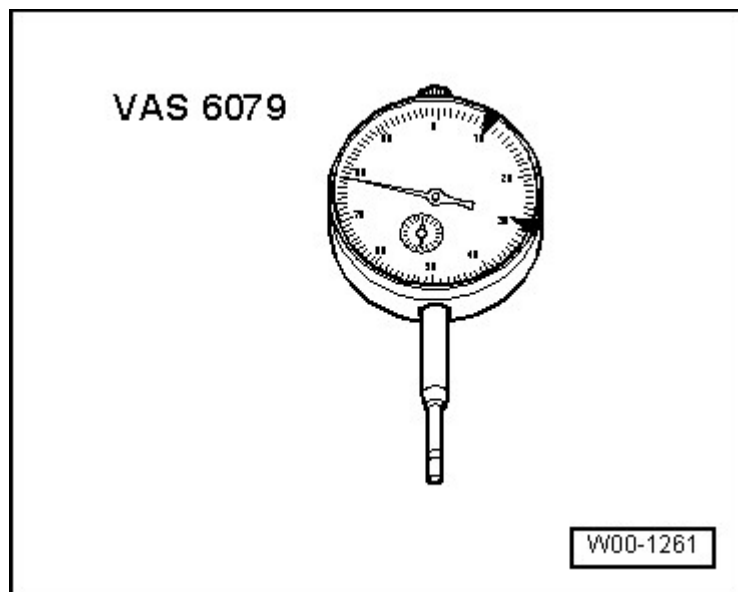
Identifying Dial Gauge 0-10 mm VAS 6079
